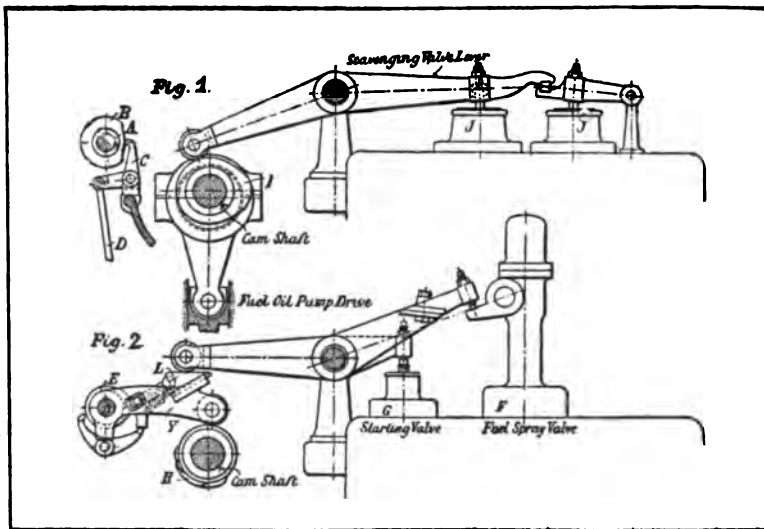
Valve mechanism of typical Diesel engine used for ship propulsion.
